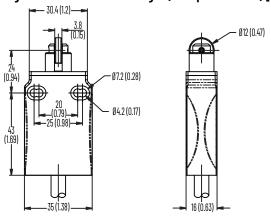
Cross Roller Plunger (Panel Mount) [mm (in.)]
